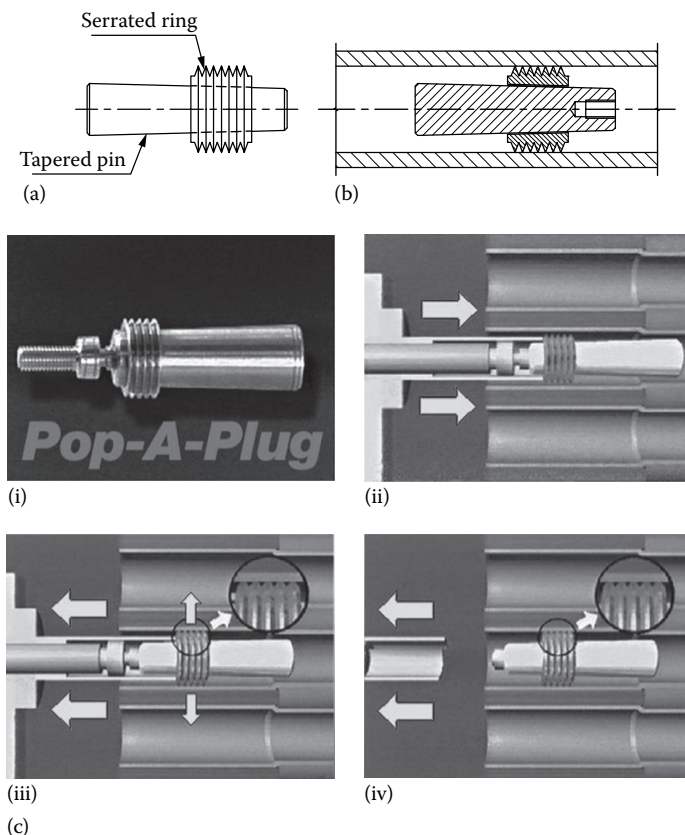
(a) Pop-A-Plug and (b) Pop-A-Plug positioned inside a tube (schematic). (c) Photo of a pop-a-plug. (i) Three mechanical parts: a threaded adapter, a sealing ring, and a tapered pin, (ii) insertion of Pop-A-Plug in to a tube, (iii) pulling of the Pop-A-Plug, and (iv) Pop-A-Plug positioned. (Courtesy of Maus Italia F. Agostino & C.s.a.s., Bagnolo Cremasco (Cr), Italy.)
